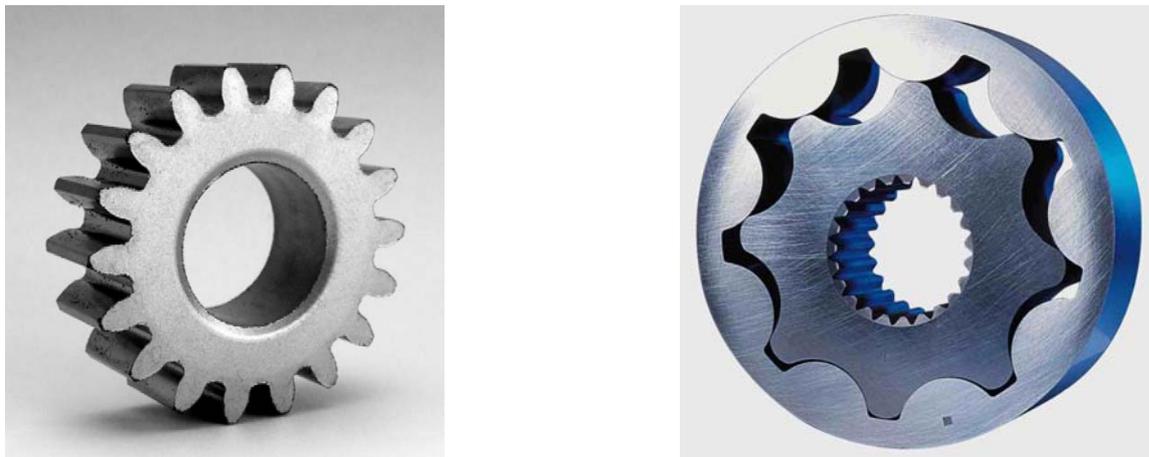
Left: Gear for High Velocity Compaction - courtesy of Cloyes Gears & Products Inc., USA
